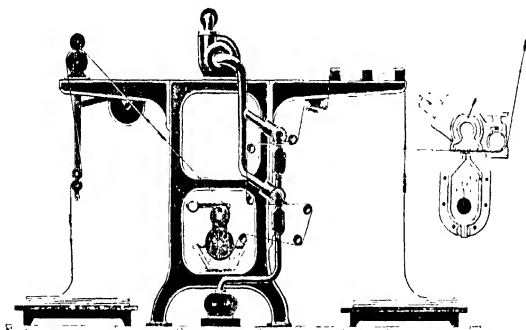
Gas Singeing Machine and sketch of Burner.
